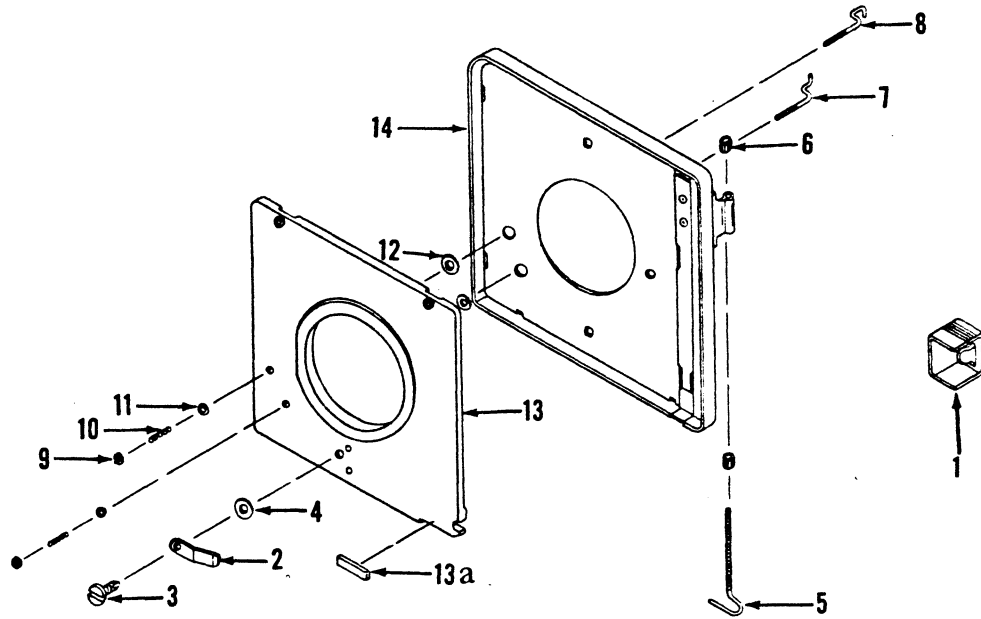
LENSBOARD COMPLETE FOR #3 GRAPHEX OR RAPAX SHUTTER
